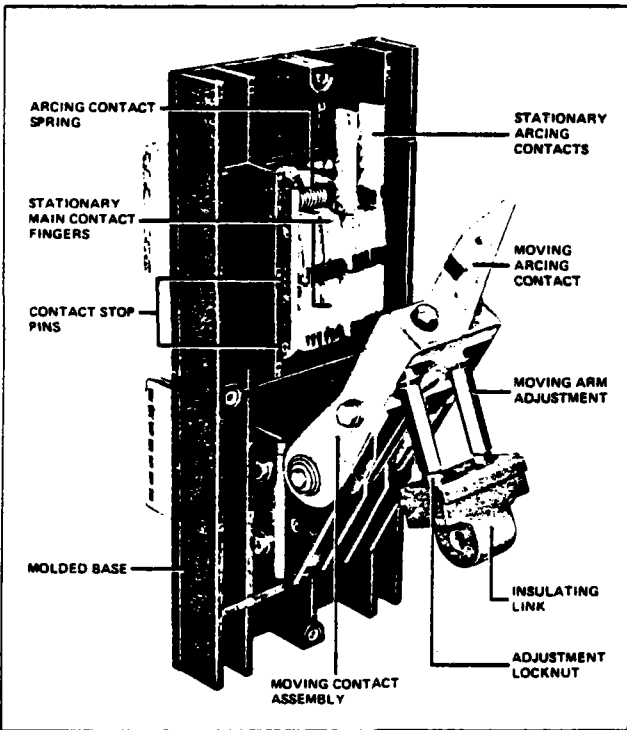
Type DS-840 Pole Unit Assembly - Front View (391094)
